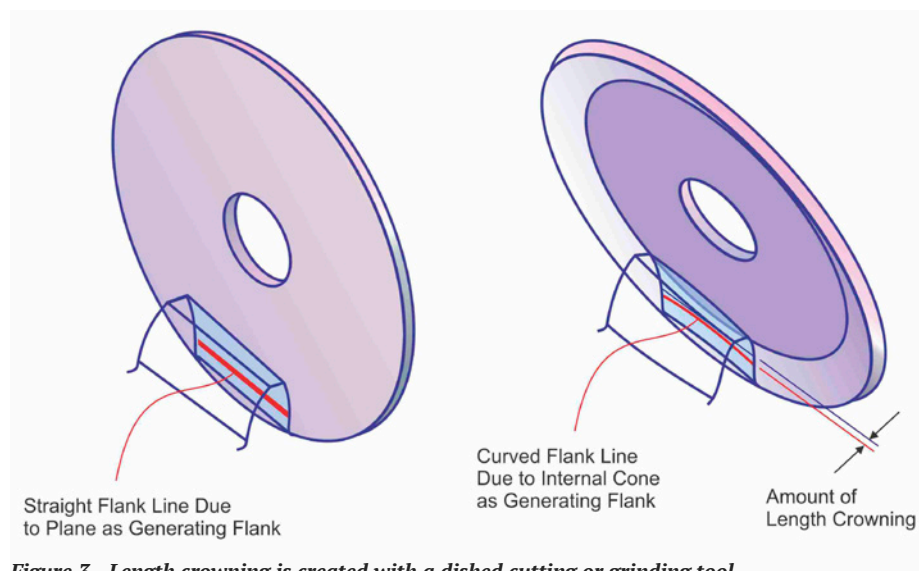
Length crowning is created with a dished cutting or grinding tool.
